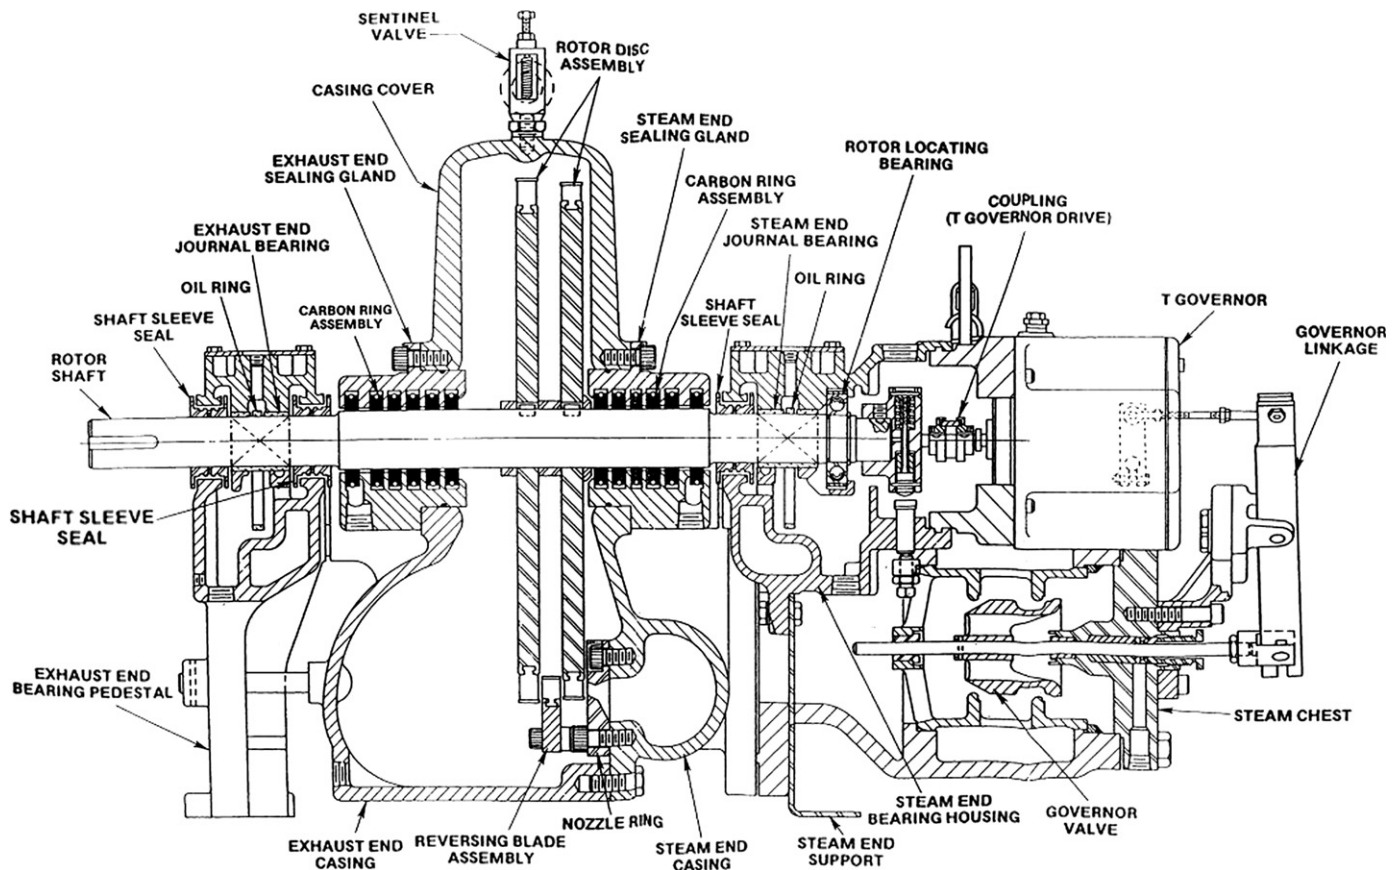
• General purpose steam turbine (Courtesy of Elliott Co.)
